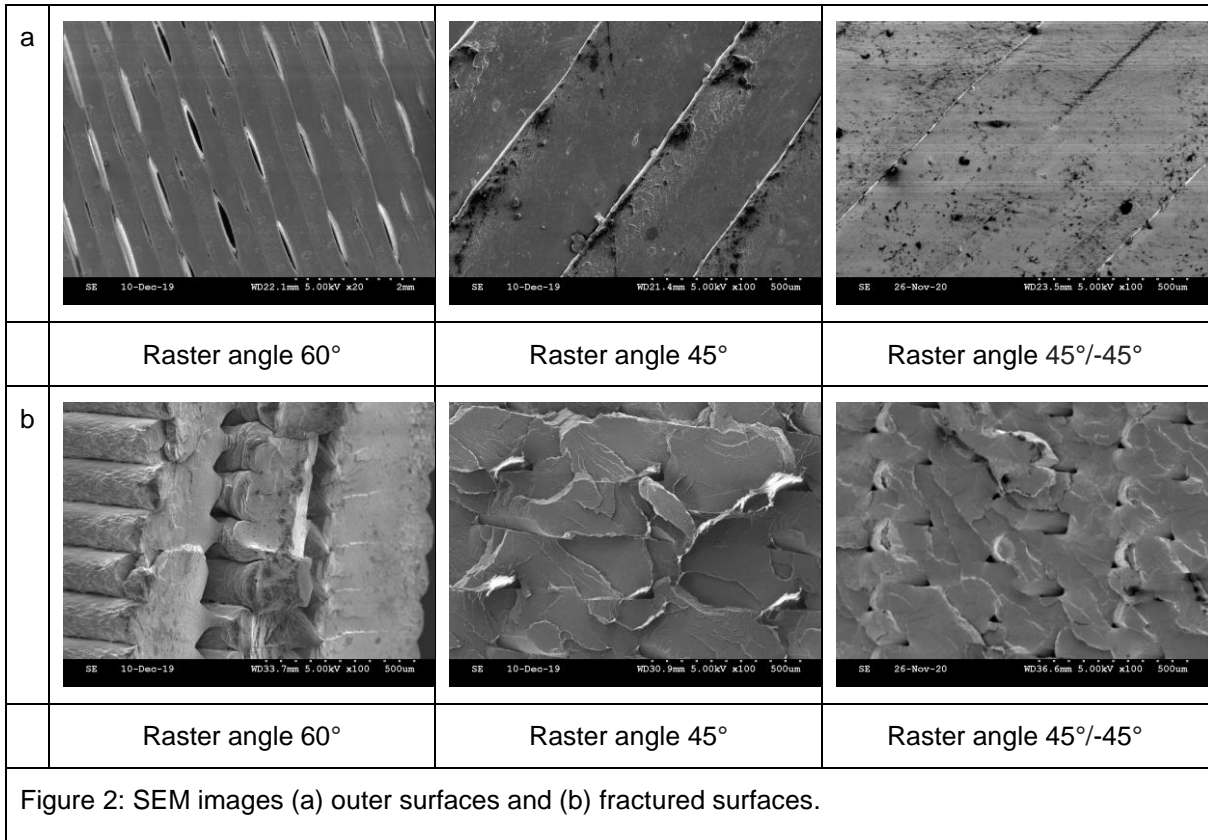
SEM images (a) outer surfaces and (b) fractured surfaces.
